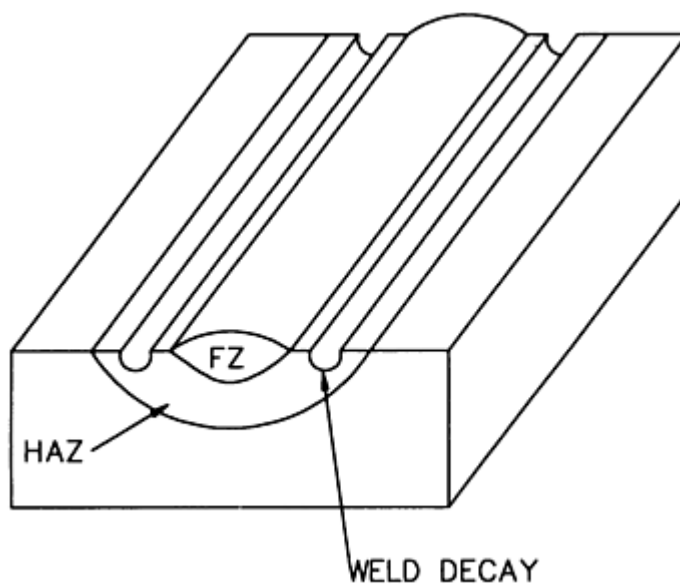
INTERGRANULAR CORROSION (WELD DECAY) OF STAINLESS STEEL WELDMENTS. FZ, FUSION ZONE
